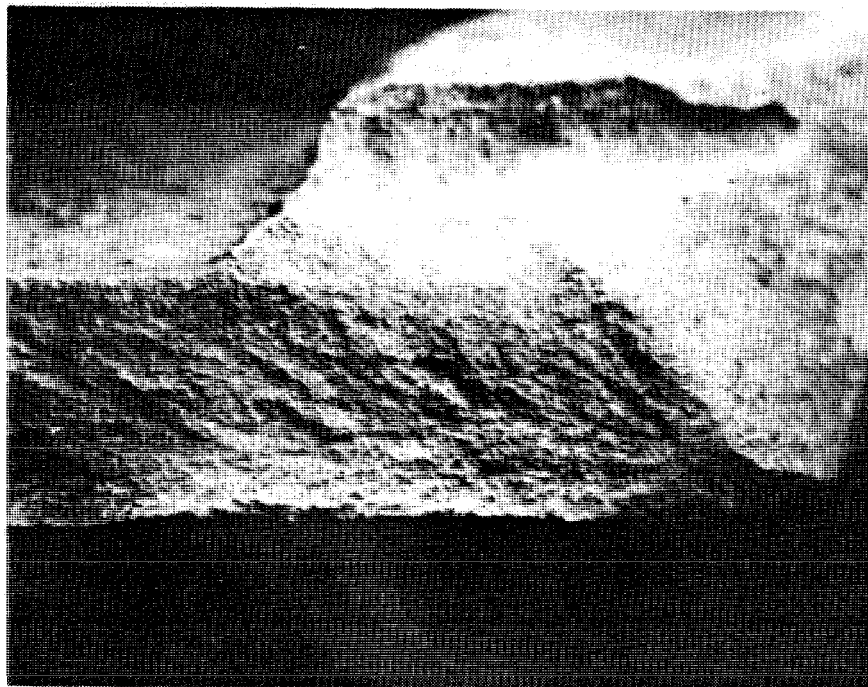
Enlargement of the crack origin on Fracture Face B. Mag. 10x.
